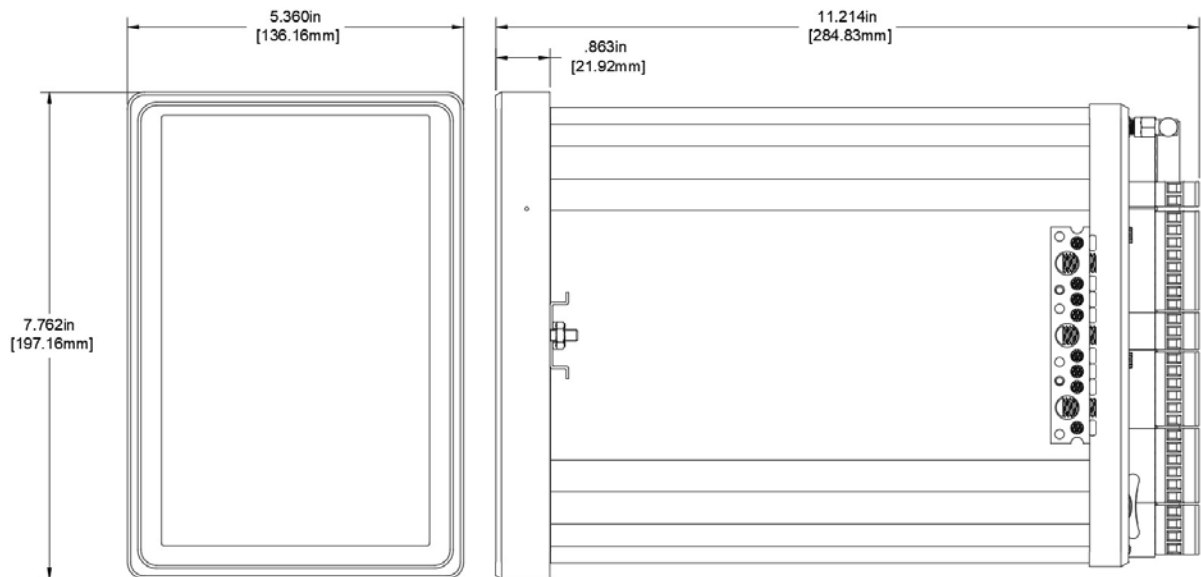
QRATE Scanner 3300 dimensions; dimensions in inches (mm)
